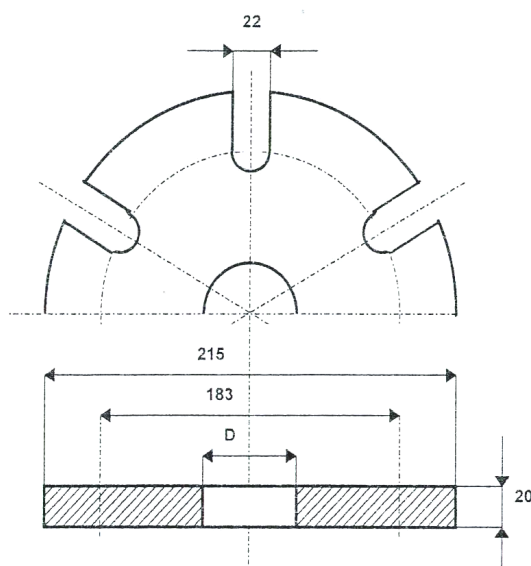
Standard connection flange for discharge of oily water and oil residues (sludge)
